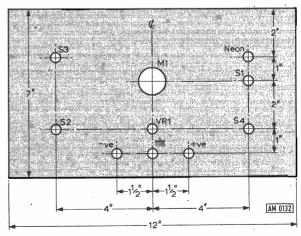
Drilling dimensions for the front panel. Hole sizes should suit the components used.
